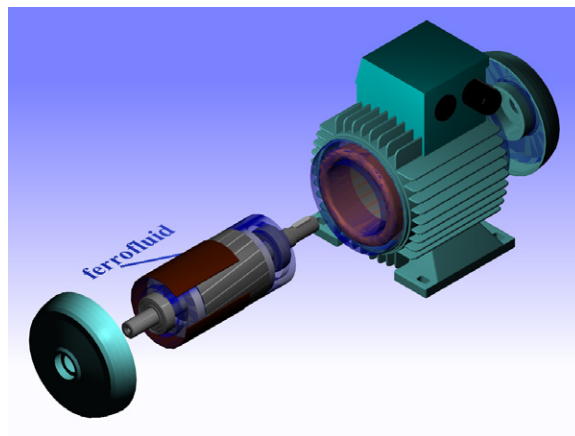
3D presentation of the ferrofluid filled construction of the rotating asynchronous electric machine.
